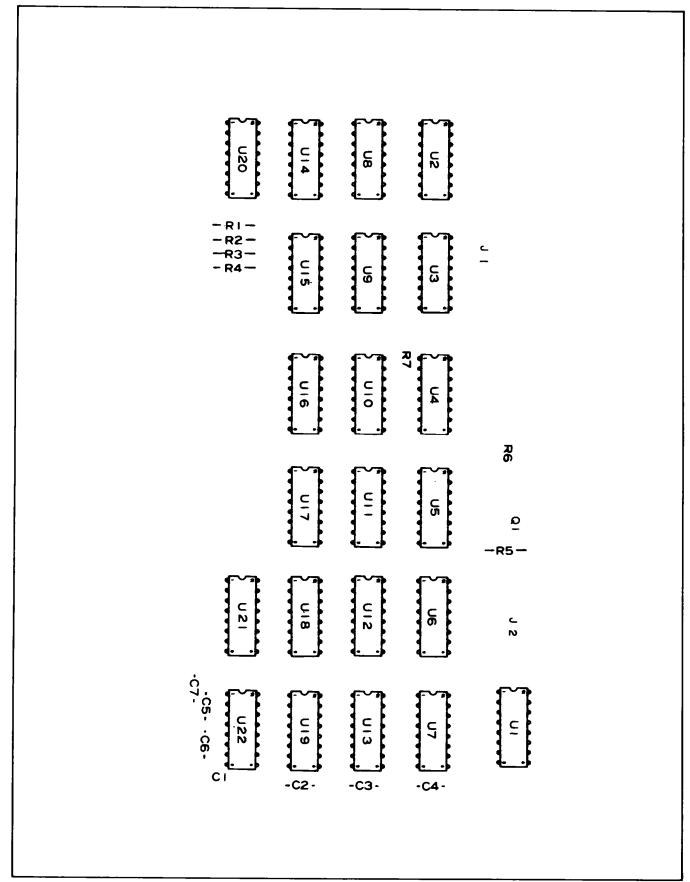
A25 HP-IB Interface Board Assembly Component Locations.
